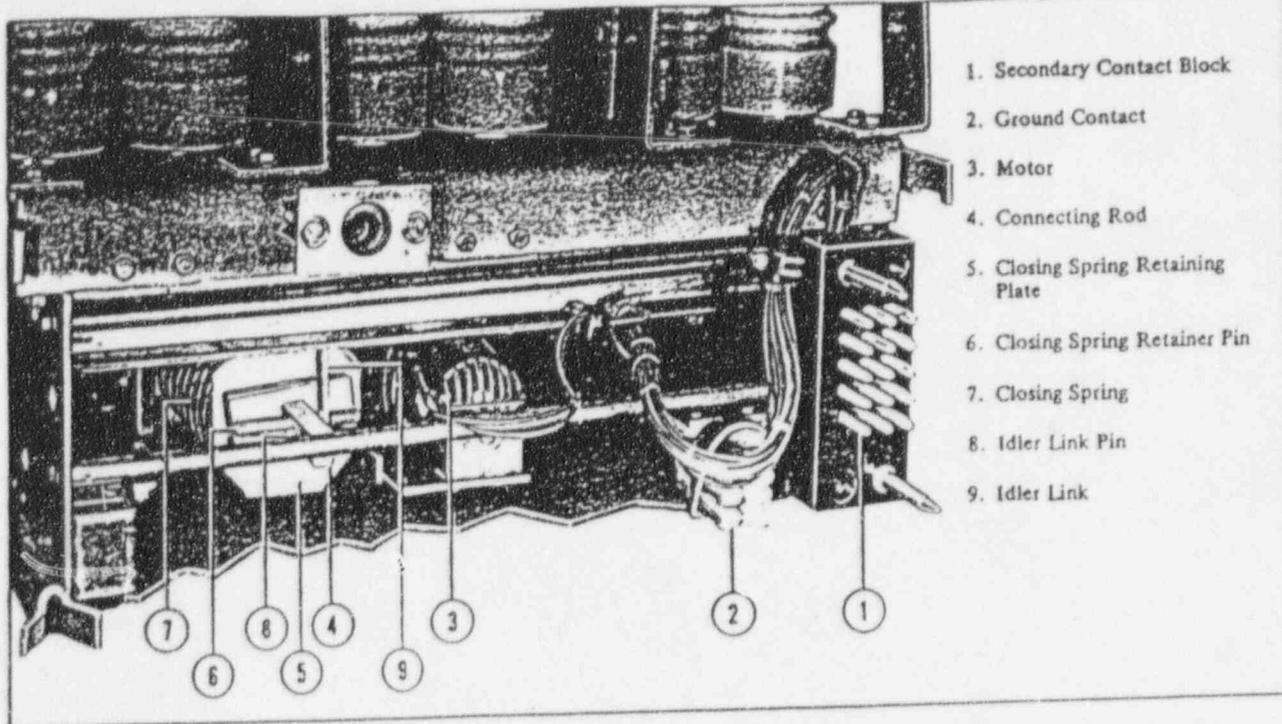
DVP Breaker Chassis: Rear View (396668)
